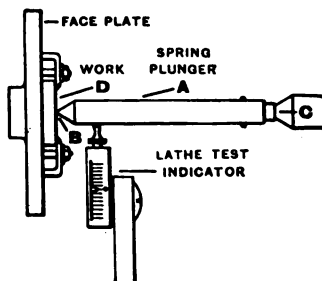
SETTING A CENTER PUNCH MARK TRUE TO AXIS OF ROTATION WITH LATHE INDICATOR.
